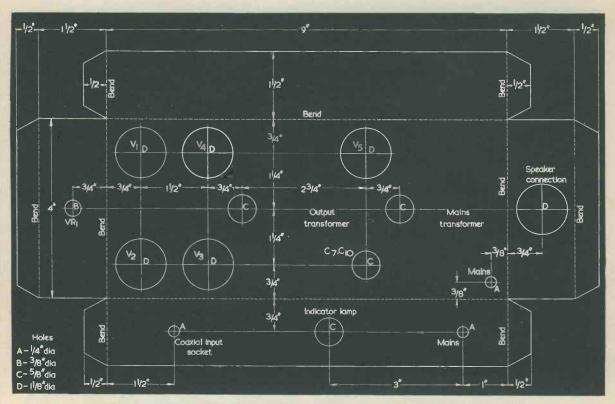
The dimensions and principal holes in the chassis. The §in hole for C<sub>710</sub> may need to be larger for some components. Before drilling mounting holes for the valveholders, check against Fig. 3 for orientation
